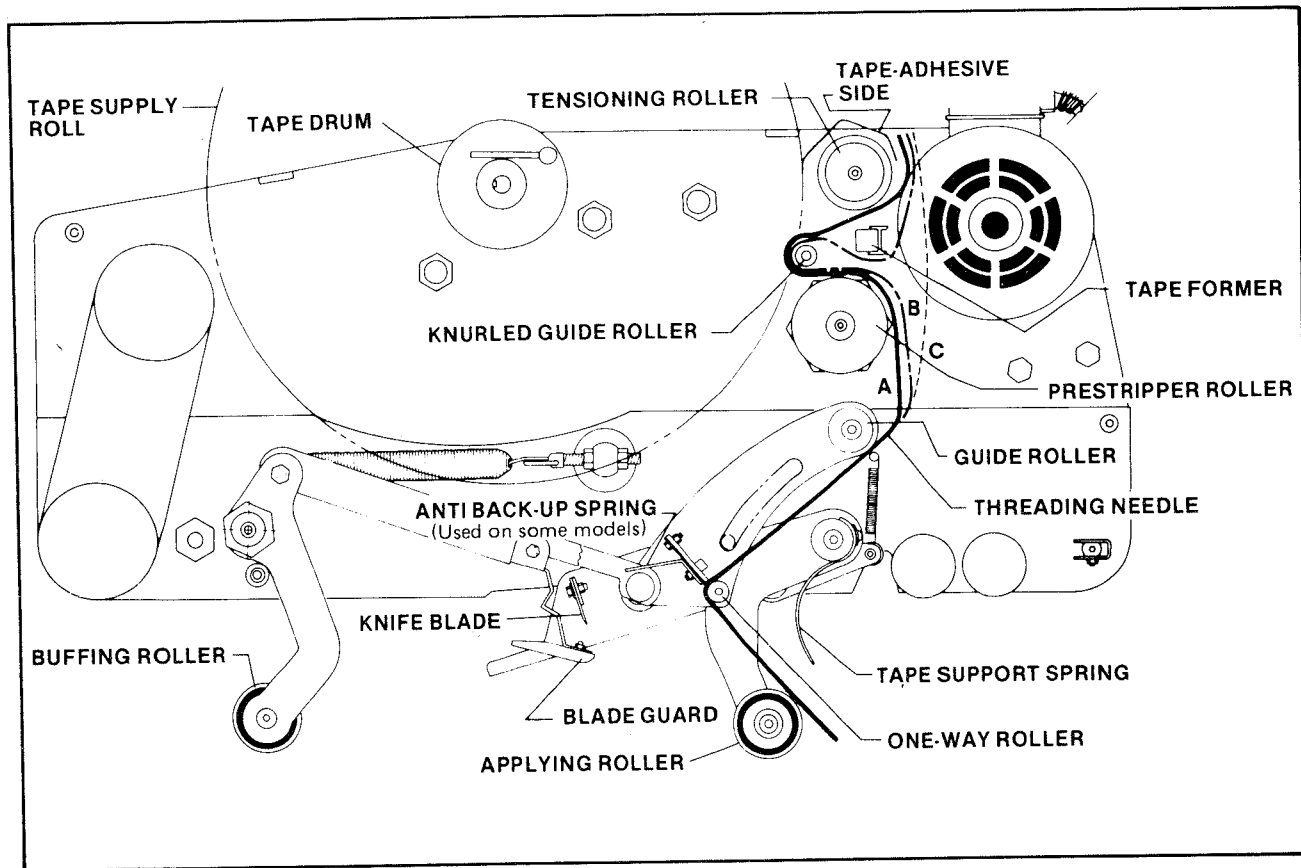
TAPE THREADING DIAGRAM - TOP TAPING HEAD - LEFT SIDE VIEW
